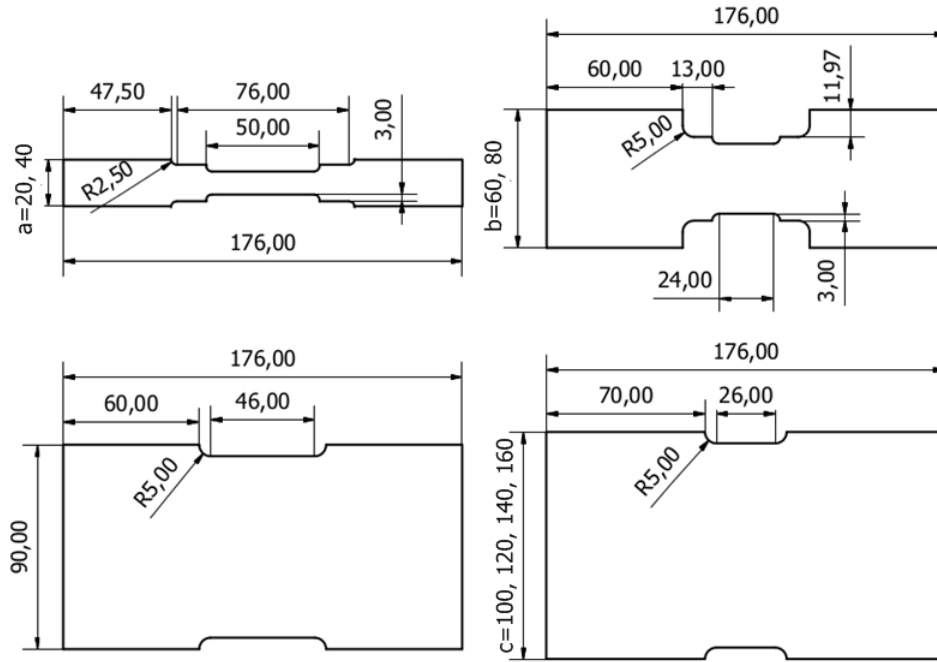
Sample geometry for the bulging test from the technical manual of the BCS-30 sheet forming universal test machine
